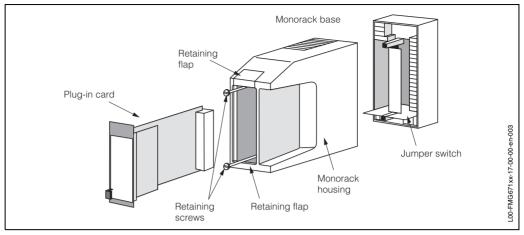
Assembly and disassembly of the Monorack II housing
